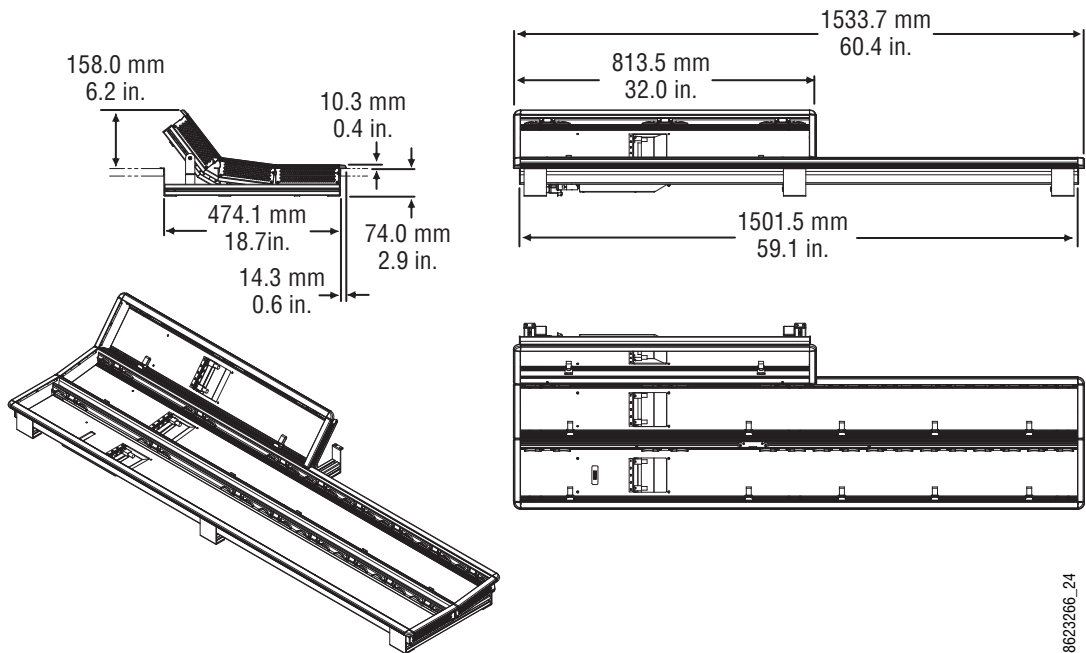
2-ME Control Panel Cutout Dimensions, Curved Installation
